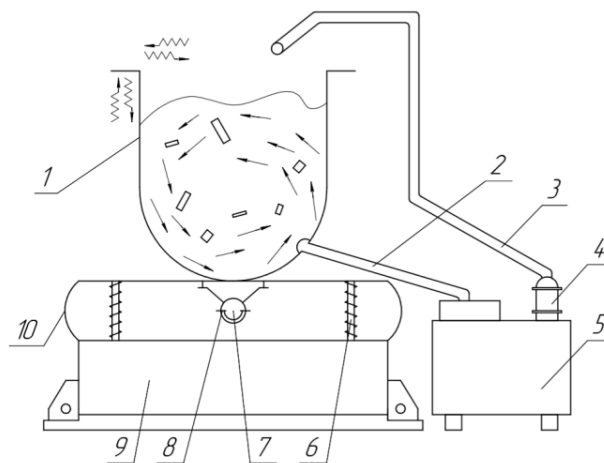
Scheme of the vibration machine: 1 - container; 2 - drain hose; 3 – solution supply hose; 4 - pump; 5 - sump tank; 6 - spiral spring; 7 - shaft with unbalanced loads; 8 - cargo; 9 - frame; 10 - tape spring
